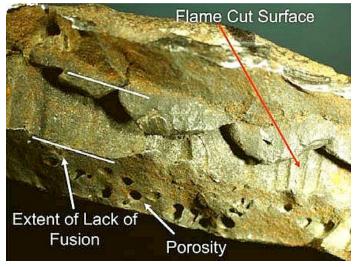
Recovered patch plate weld from failed Tank 7
